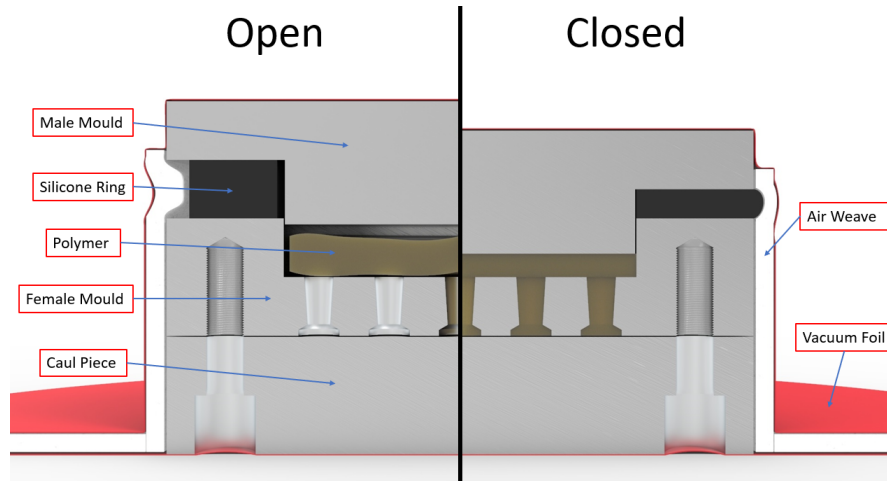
The mould setup in open and closed condition inside of the vacuum bag.
